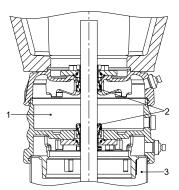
CR 120 and 150 with back-to-back seal arrangement
